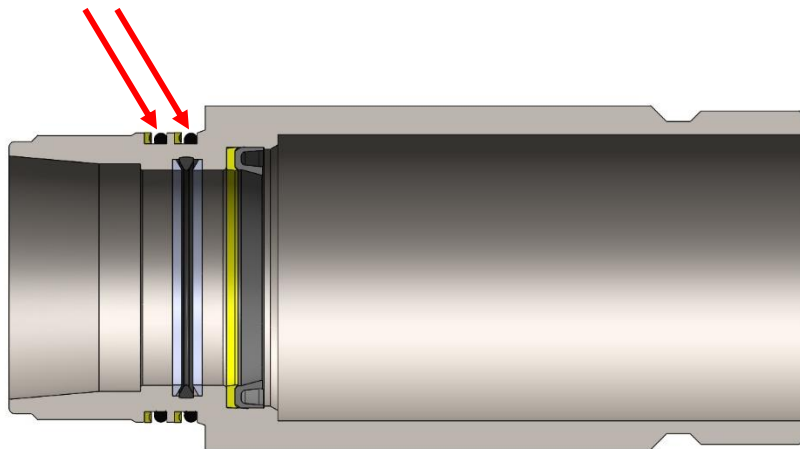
Image showing Outer Adaptor main body O-rings and Back-Ups
